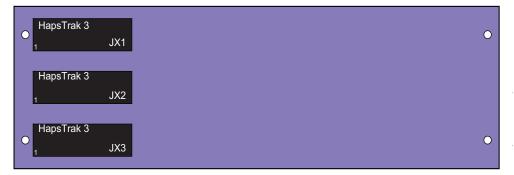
DDR3\_SODIMM2R\_HT3 Daughter Board Layout
